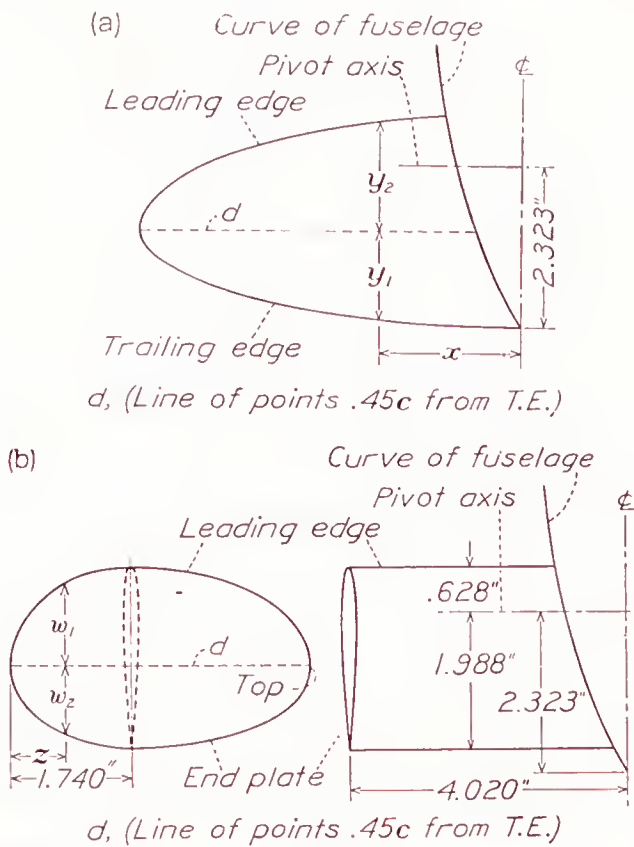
Combination 316 showing rectangular tail surfaces with end plates.
